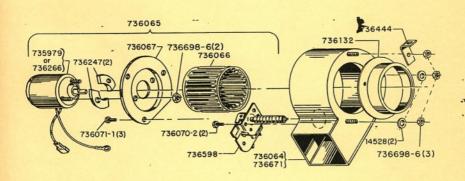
VENTILATING AIR BLOWER ASSEMBLY 736469-736672 USED ON KIT MODELS 8342-8346
